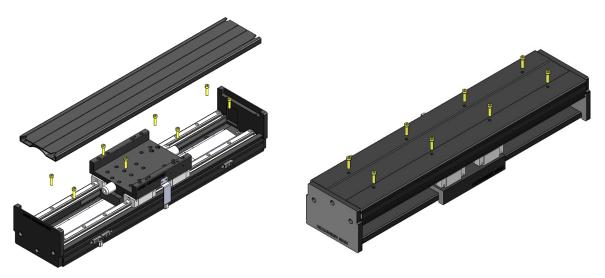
Assembling the linear motor system – here for LMSSA-08/10/13 Dust-proof type linear motor stages
